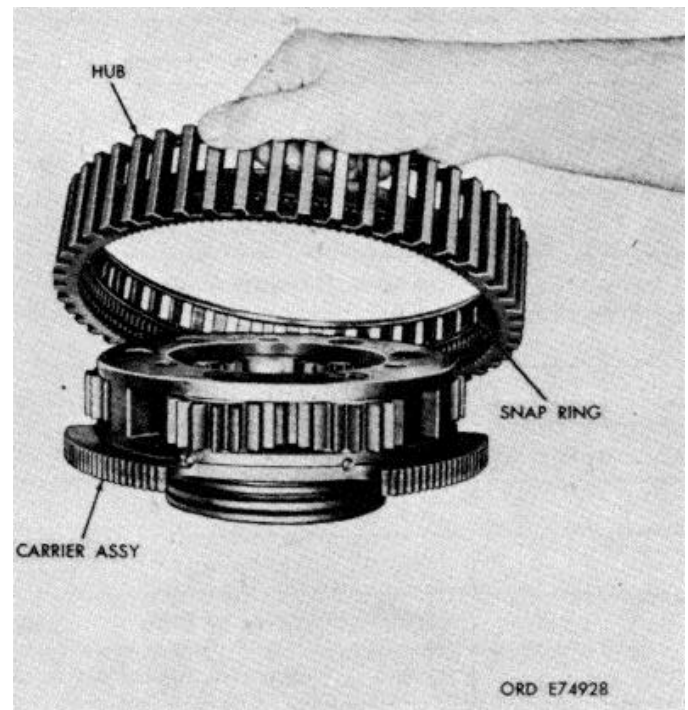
Installing reverse-range clutch hub onto carrier assembly.
